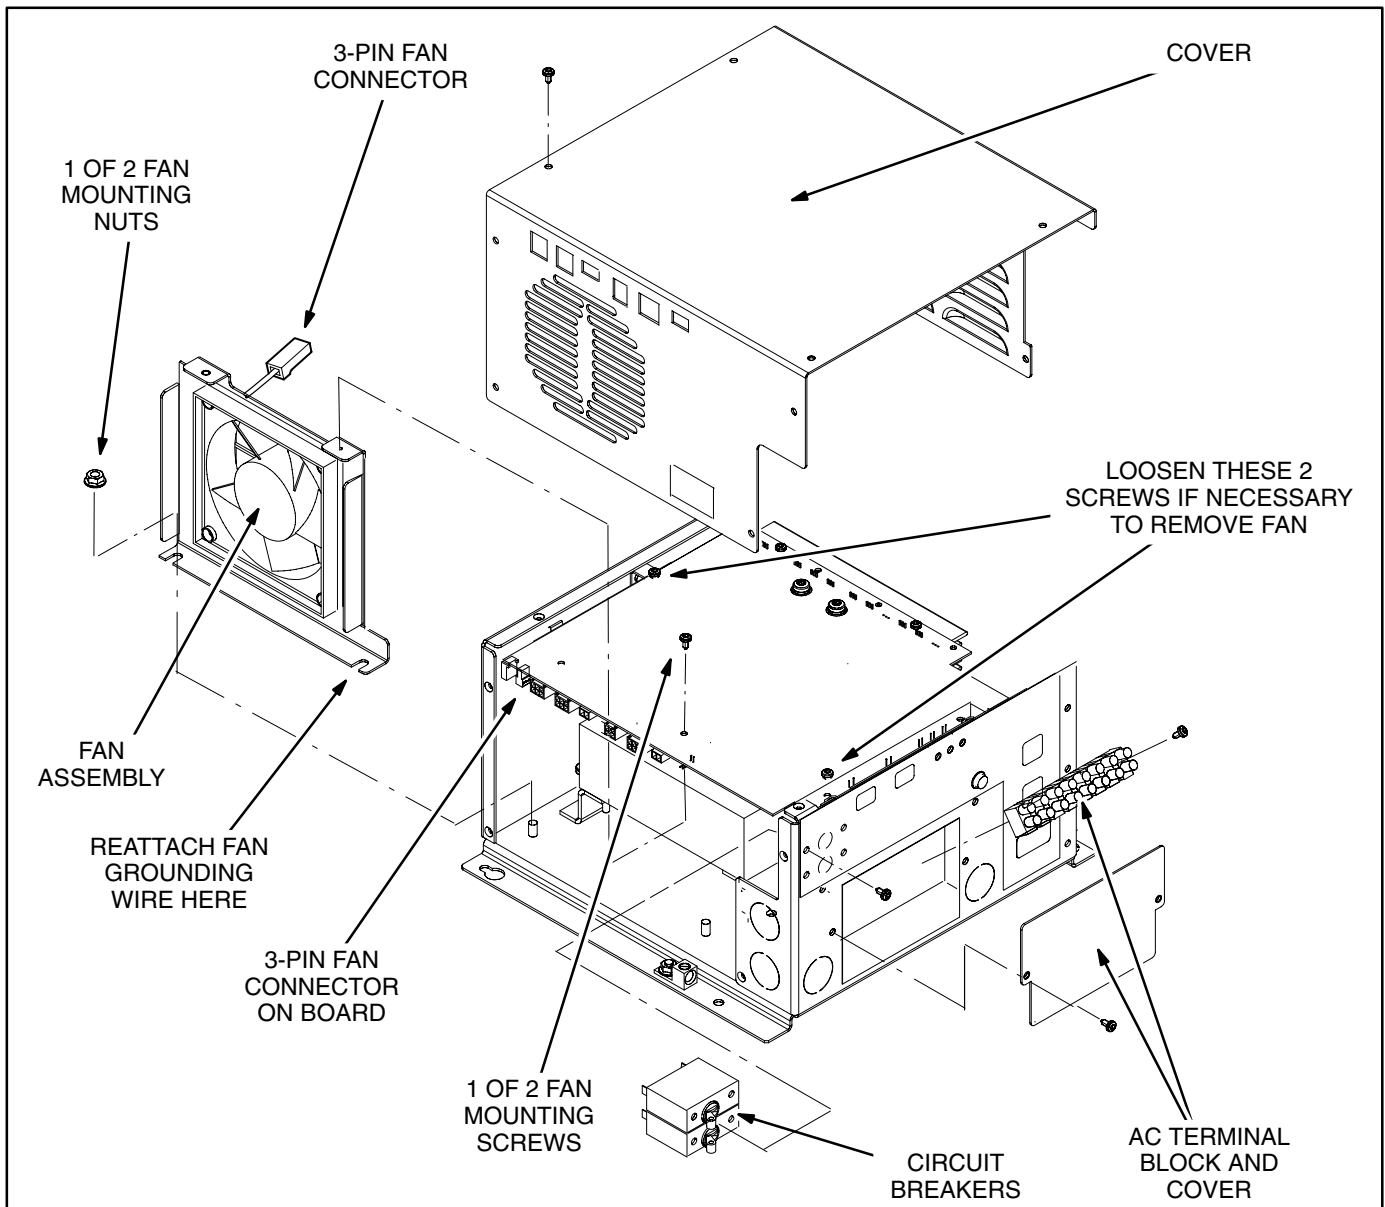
REPLACEABLE PARTS OF THE INVERTER-CHARGER
